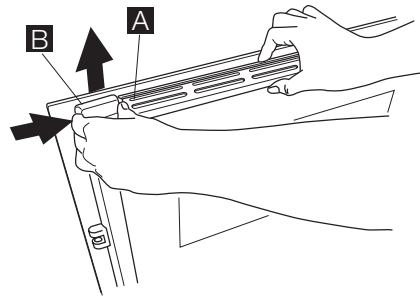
With the right hand hold the perforated aluminium plate ("A") in position and with the left hand remove the retainer "B" of the inner pane. Then to unlock the retainer, press it to the right and then pull it upwards.
